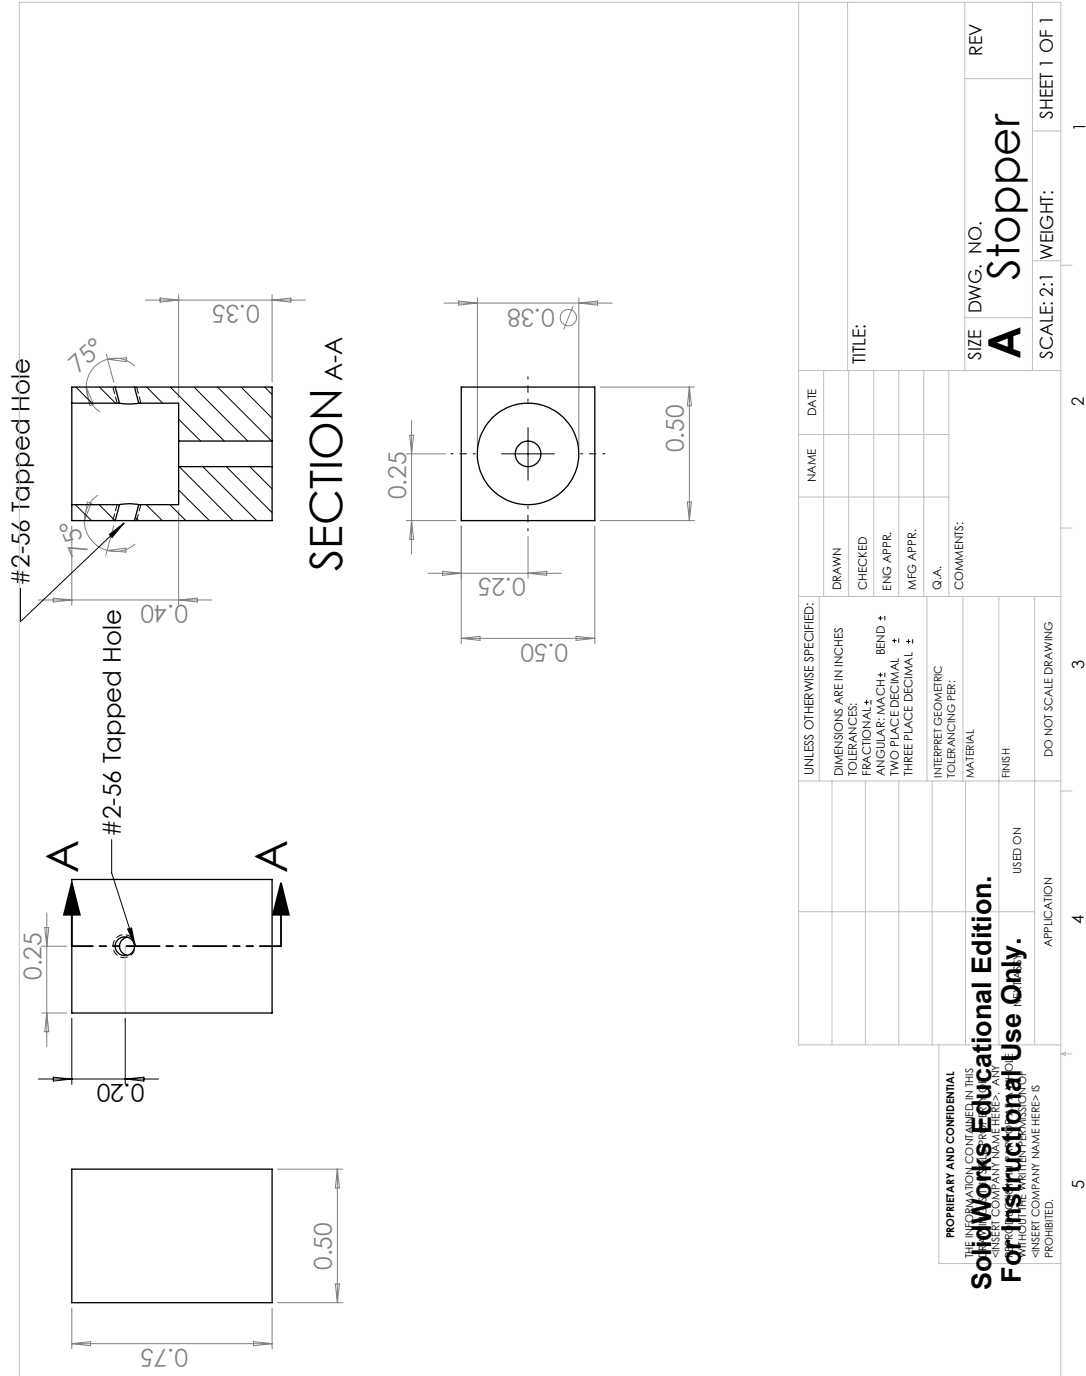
Drawing of stopper block used for atomic beam shutters.
